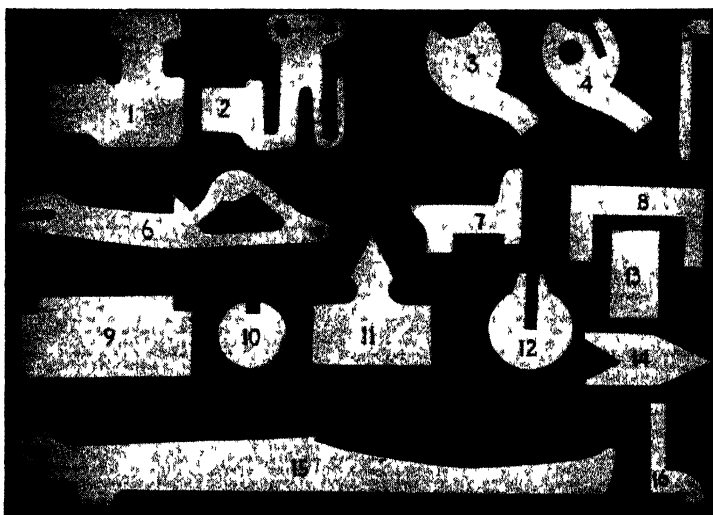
Various blanks 1, 2, 3, and 4, sewing machine parts; 5, thin key, 6, adding-machine lever, 7, 8, 9, special shims, 10, key disk; 11, indicator pointer; 12, split washer; 13, 14, tag blanks; 15, type-key lever; 16, small rocker arm.
